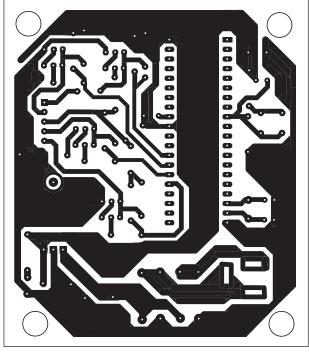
Actual-size, single-side PCB for stepper motor control system using 89C51 microcontroller
